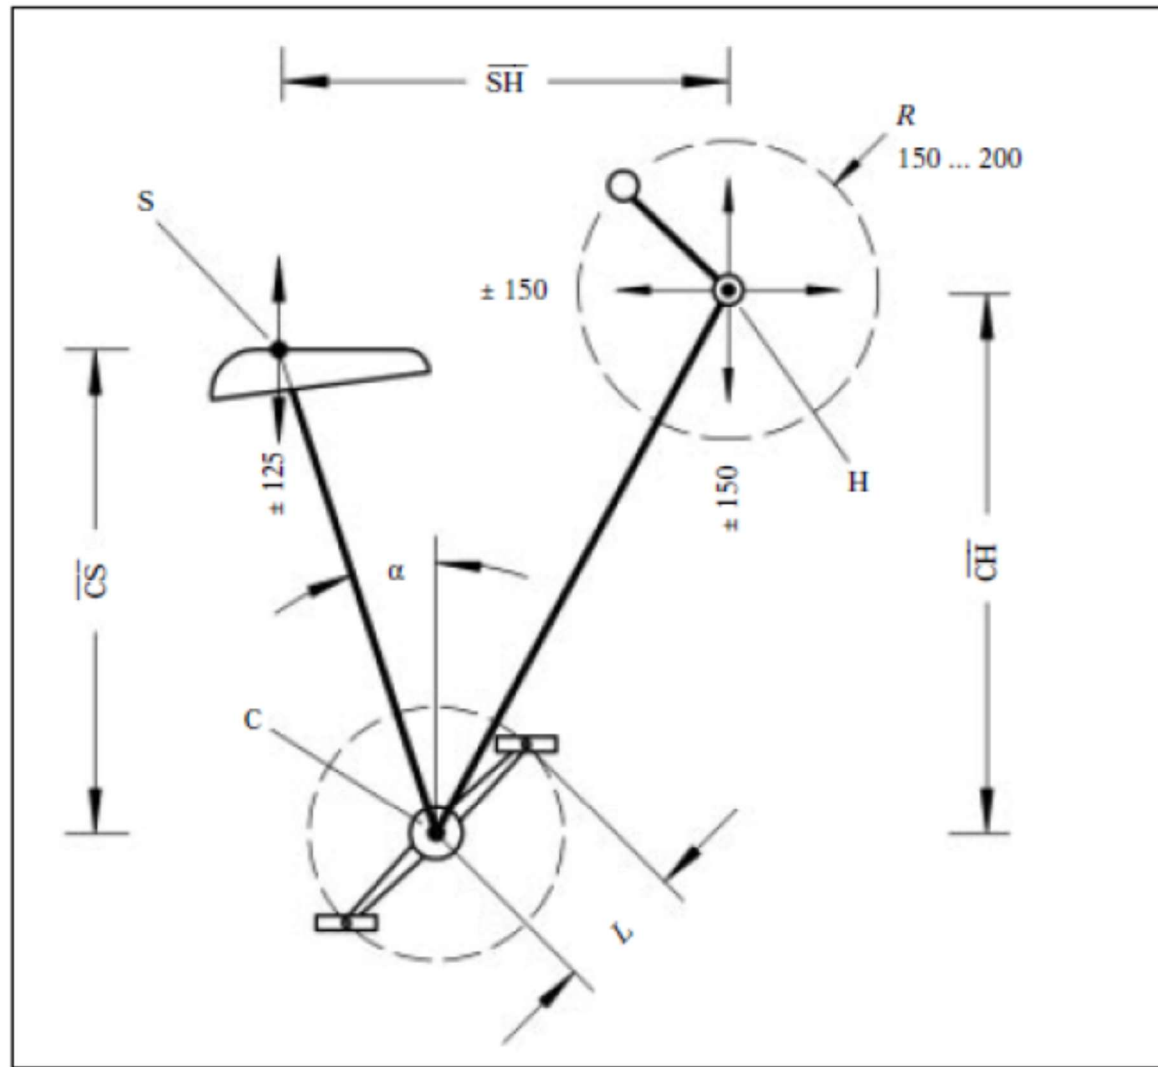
Definiton of basic saddle position S, basic handle position H and centre of foot crank bearing C (dimensions in mm).
